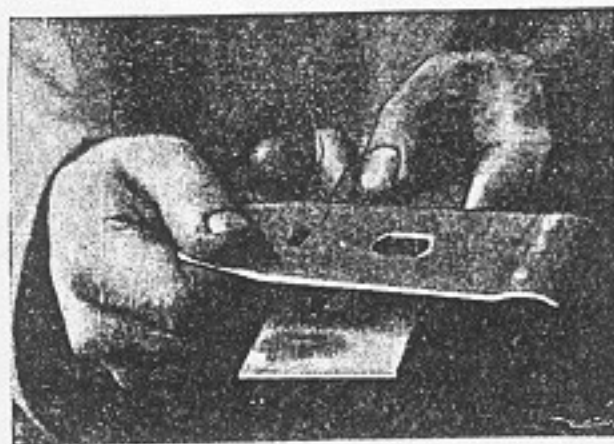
Inserting cap screw into plane iron while holding the two irons at right angles to each other.
